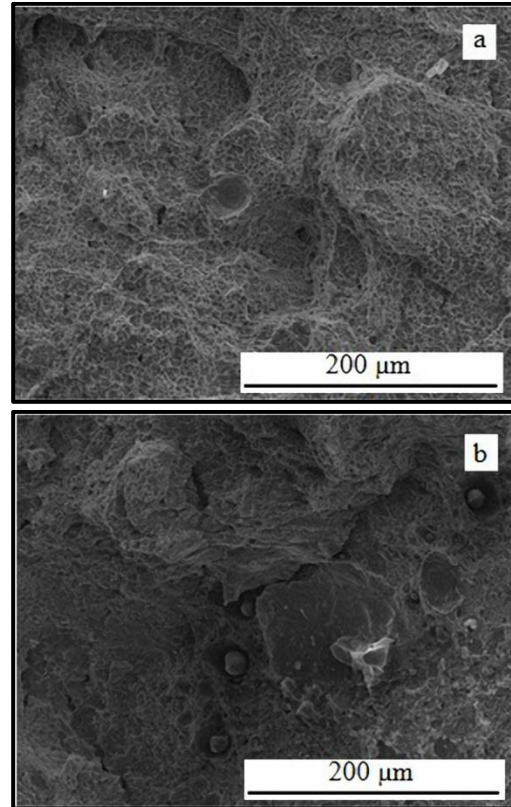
Fracture behaviour of the welded samples, a) X₂, b) K₁
